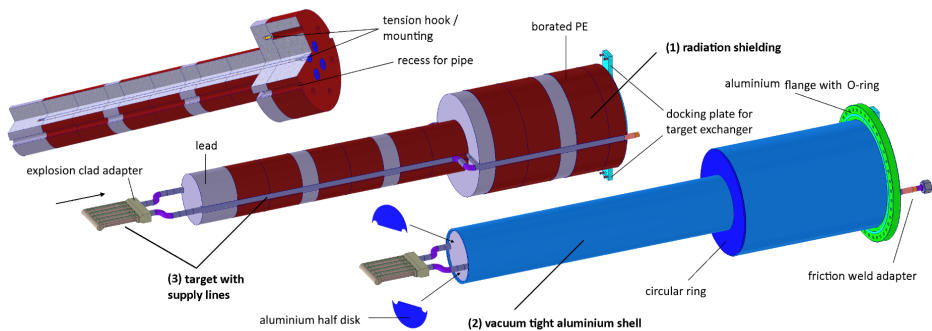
Schematic assembly of the target plug: Layered shielding with grooves for cooling lines inside (top left), Target with adapter to aluminum lines (center), Aluminium vacuum shell with conventional O-ring flange and water connection (bottom right)
